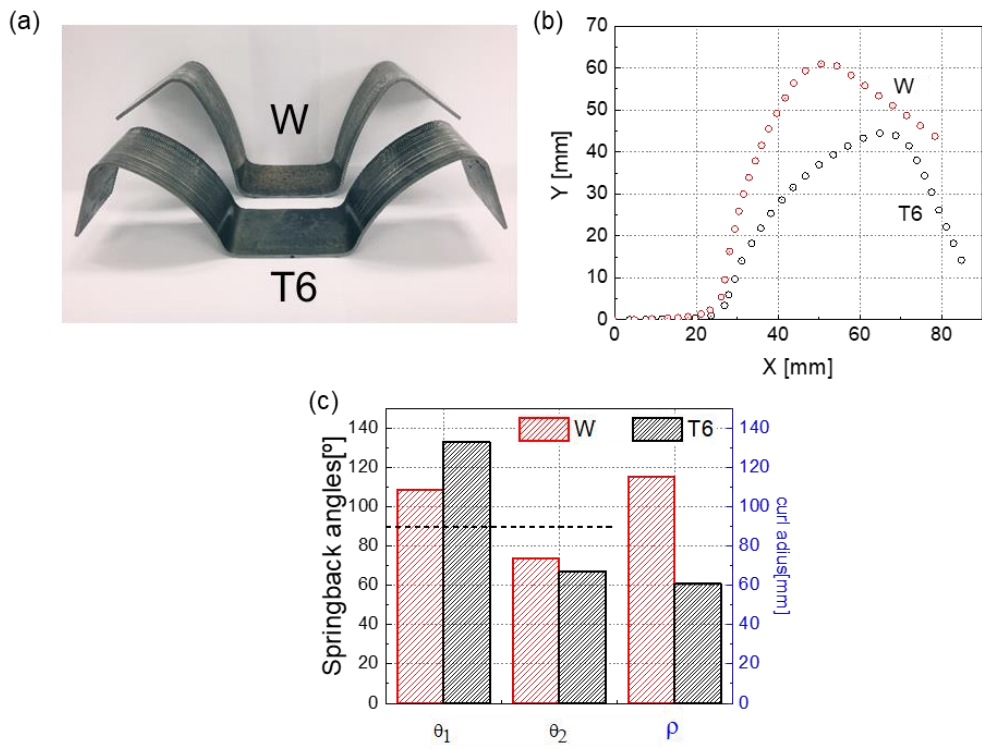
(a) The specimen after springback, (b) comparison of springback profiles, and (c) springback parameters of the T6 and W sheets.
